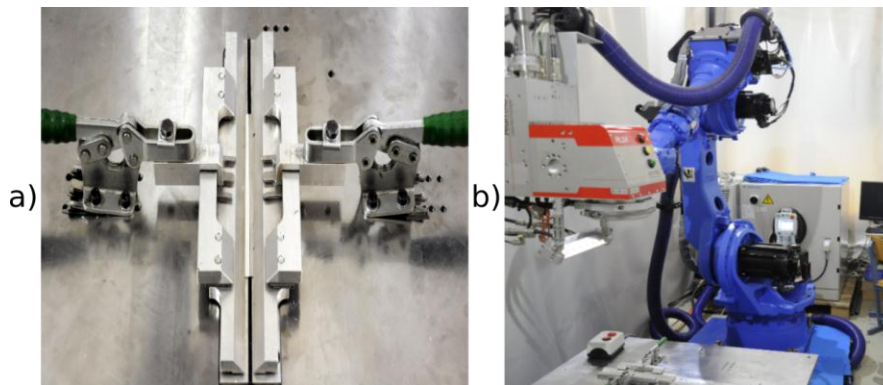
Clamping system used for securing samples (a); robotic setup used for welding (b).
